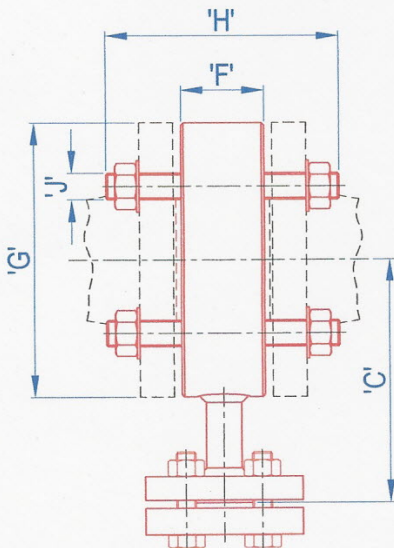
globe valves are supplied to PN40 rating. Valves can be supplied PN16 rated (refer to PN16 data sheet). Details of other flange ratings supplied upon request.
